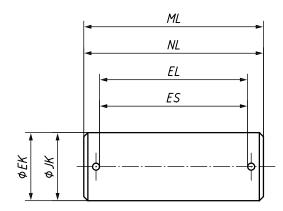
AA4-S — Pivot pin, plain bearing (split pin type) or AA6-S — Pivot pin, spherical bearing (split pin type)
